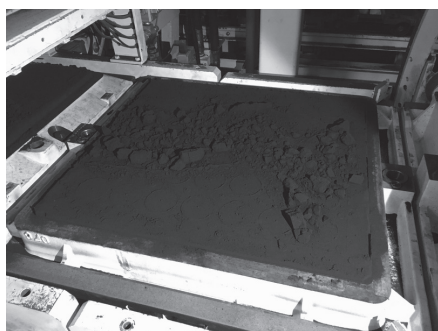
Shape of the nozzle part at the back side of ACEX mold.
